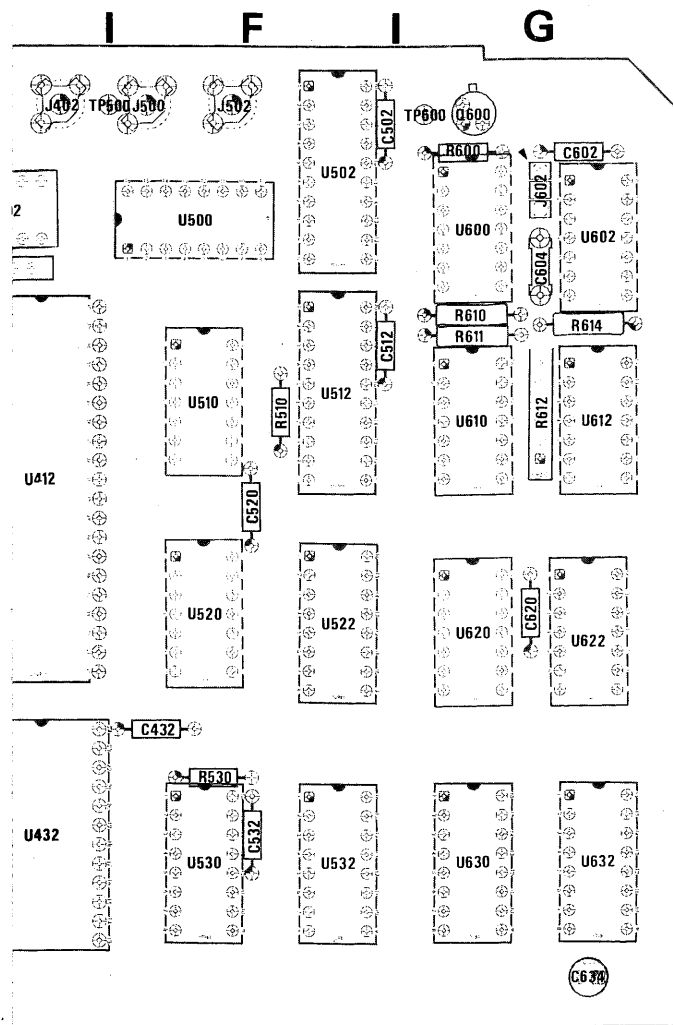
IEEE 488 Interface circuit board, assembly A56.
